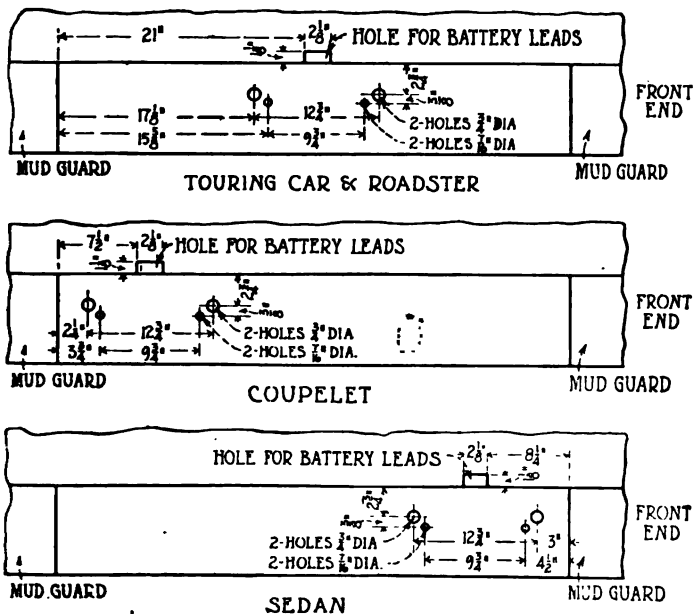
Layout of right-hand runningboard for mounting battery box on the different models of the Ford car
